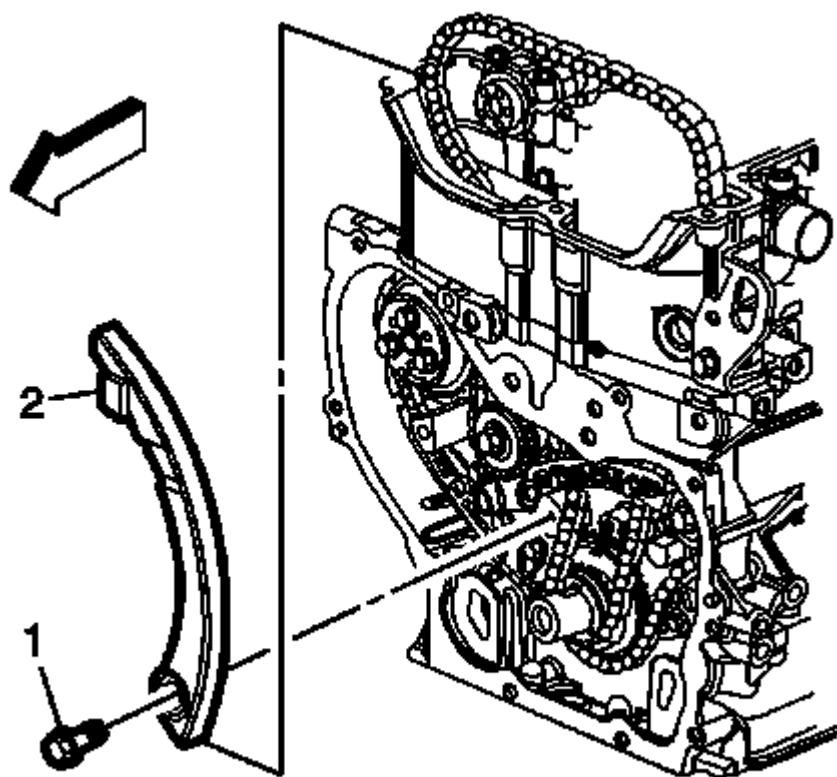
Timing Chain Tensioner Guide Bolt And Guide
